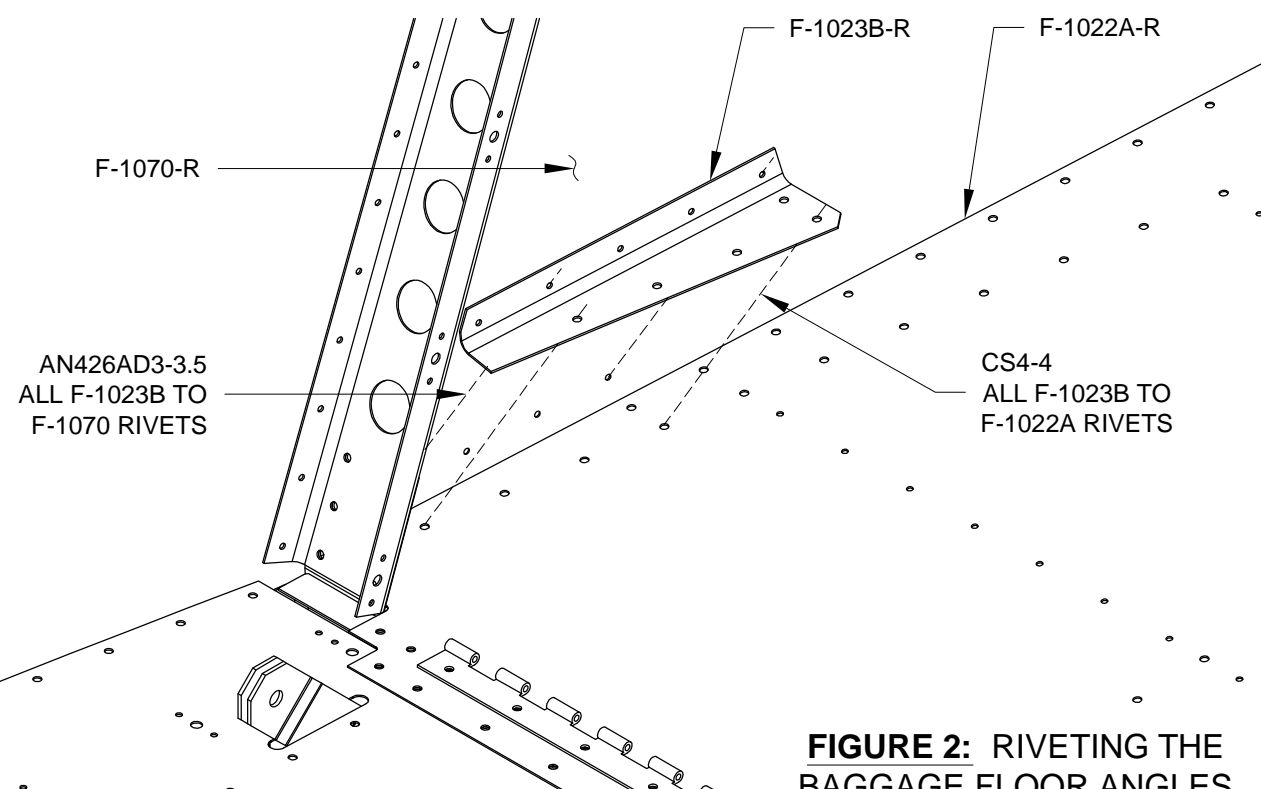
RIVETING THE BAGGAGE FLOOR ANGLES
